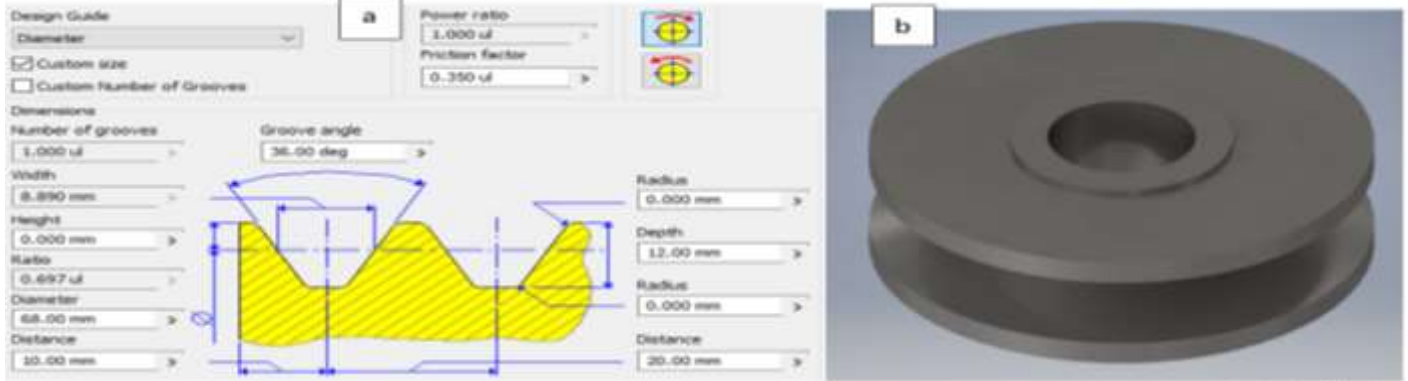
(a) Design geometry of the driving pulley (b) CAD model of the driving pulley
